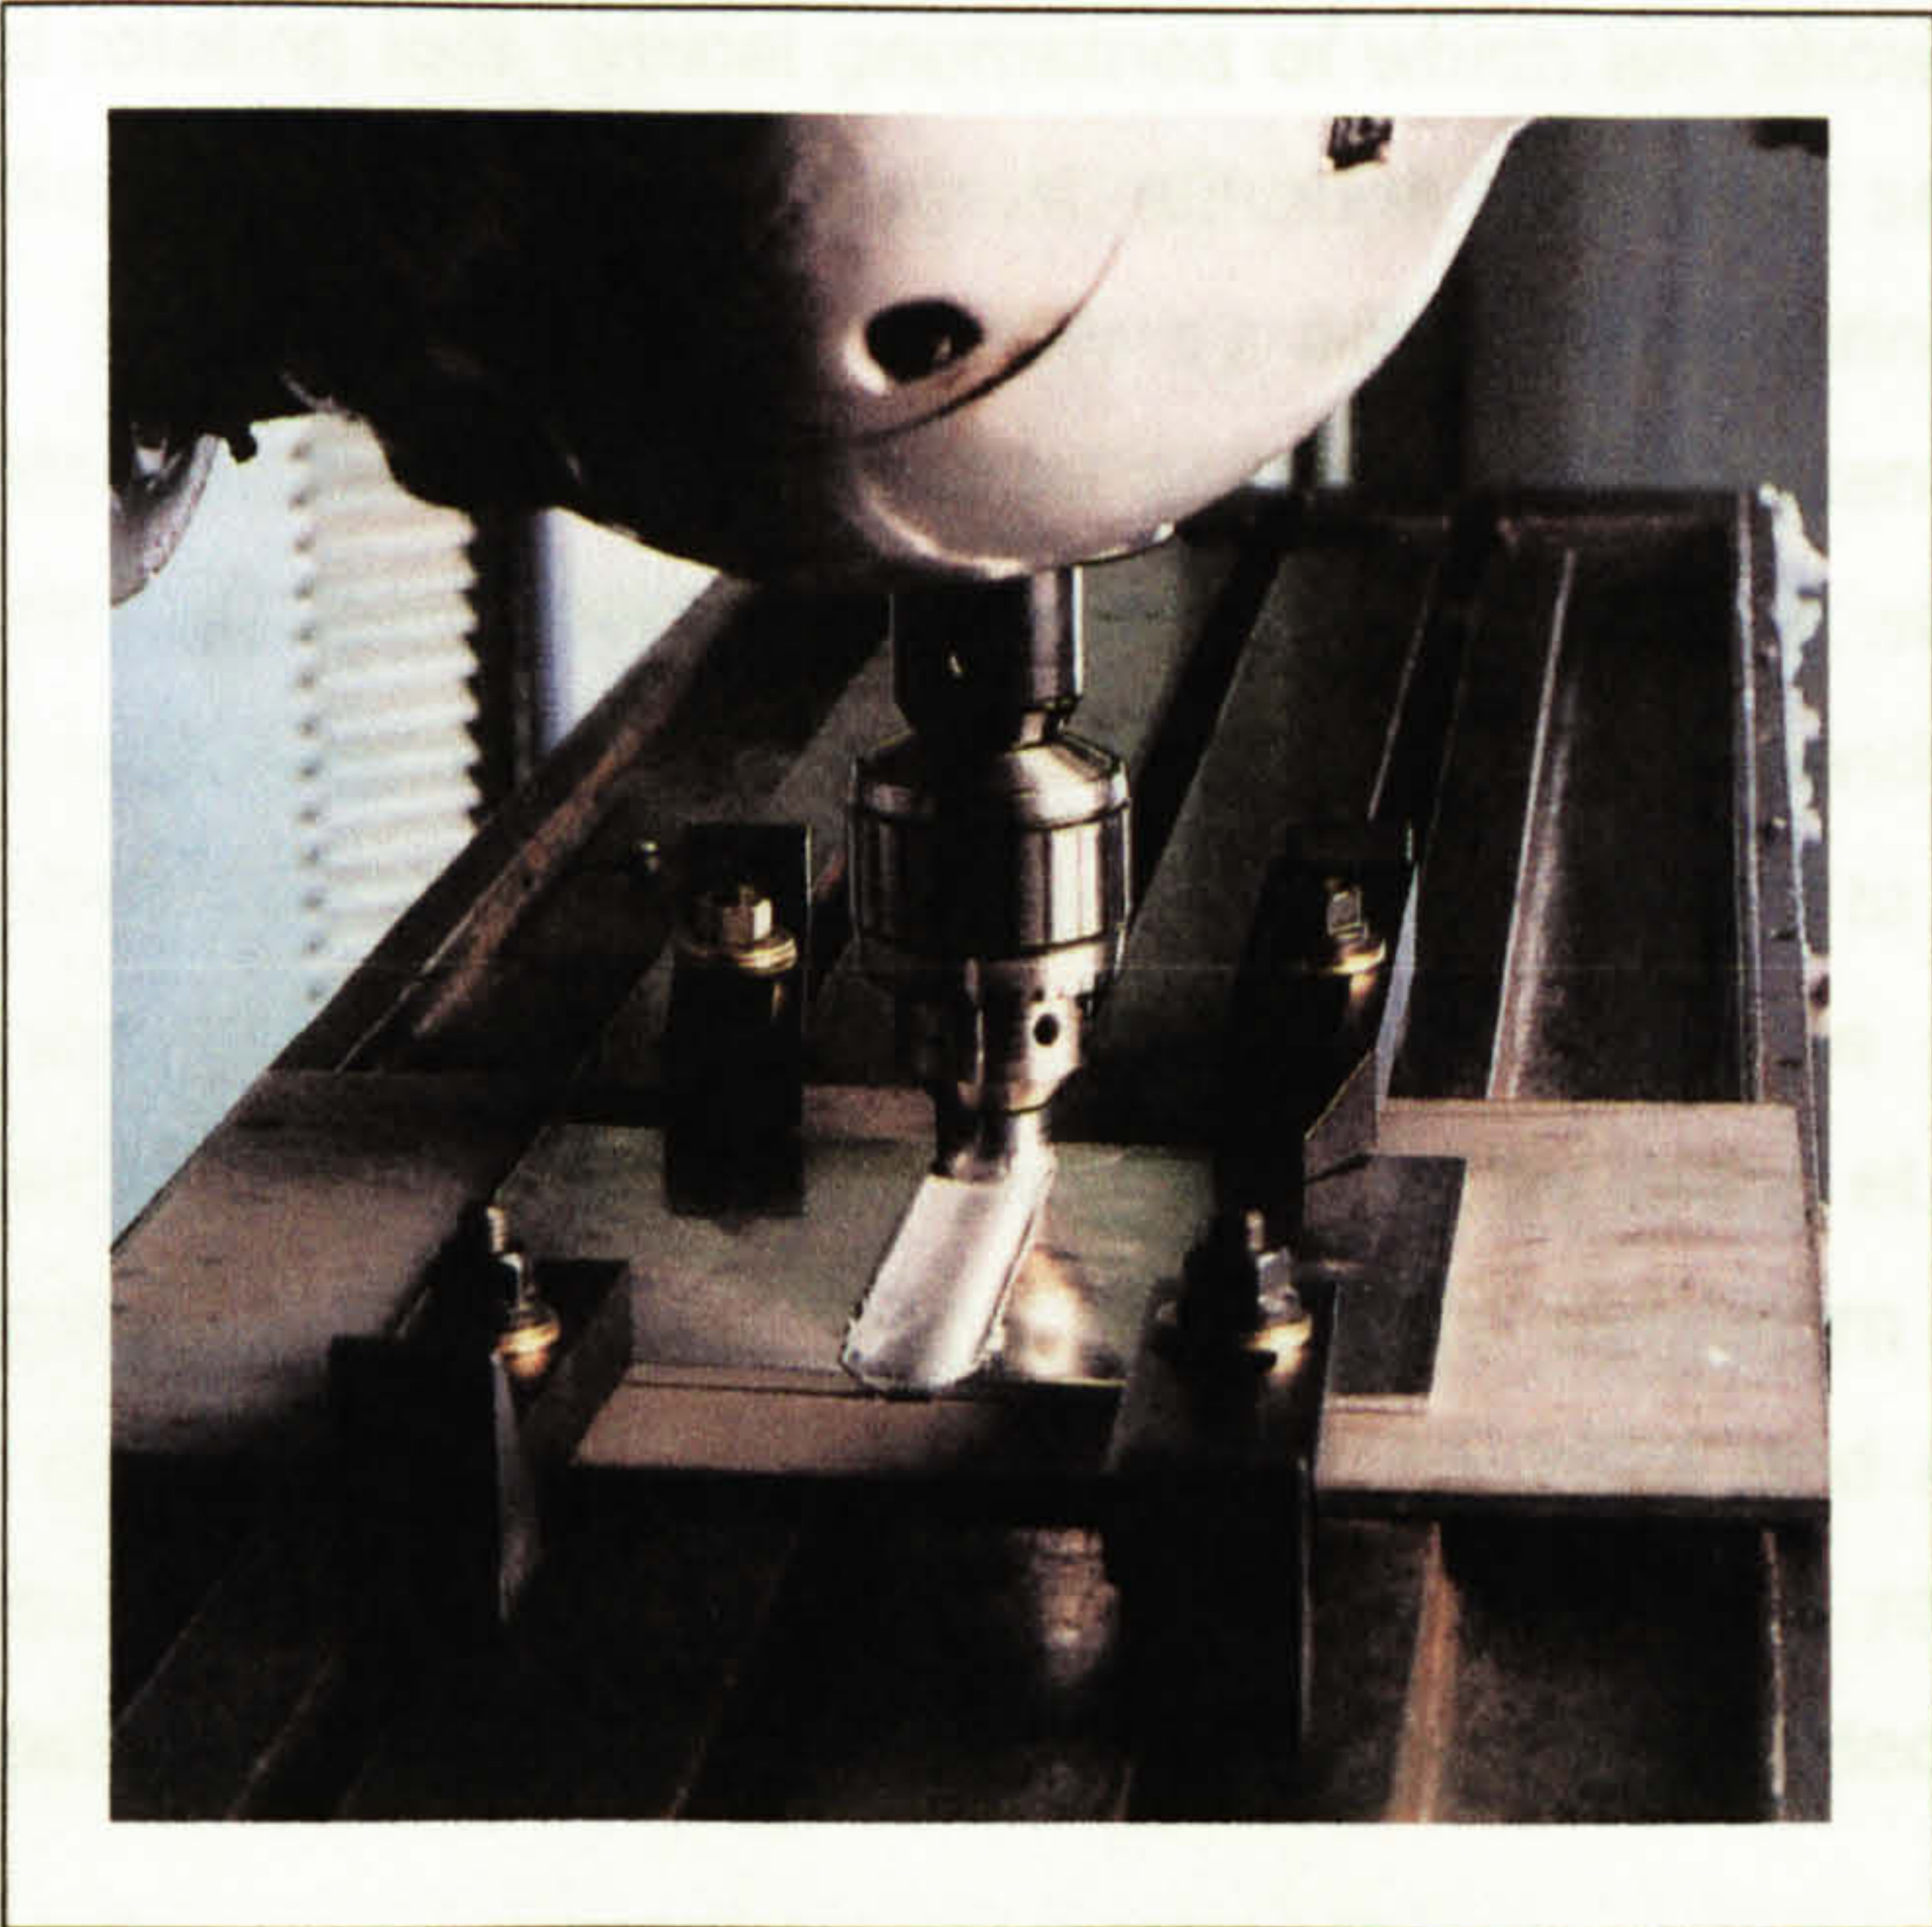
Close up of friction stir welding at the Edison Welding Institute¹
